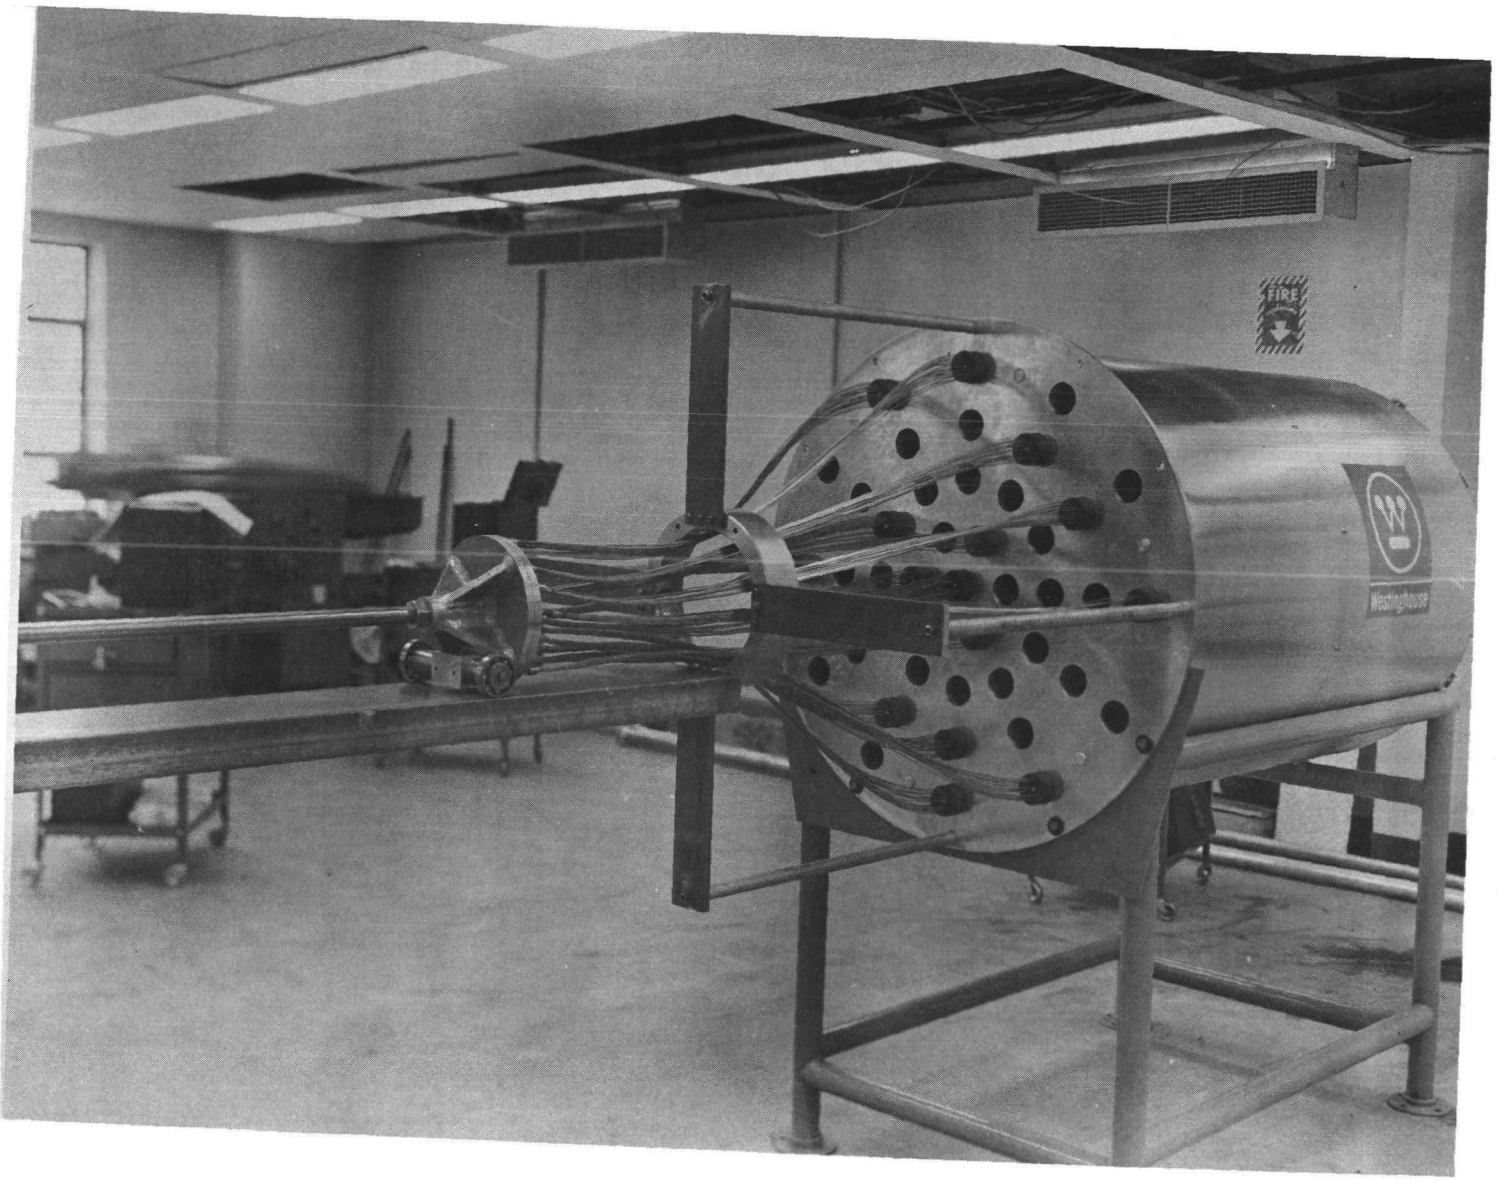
FRONT FACE ASSEMBLY SHOWING CLUSTER LOCATIONS
